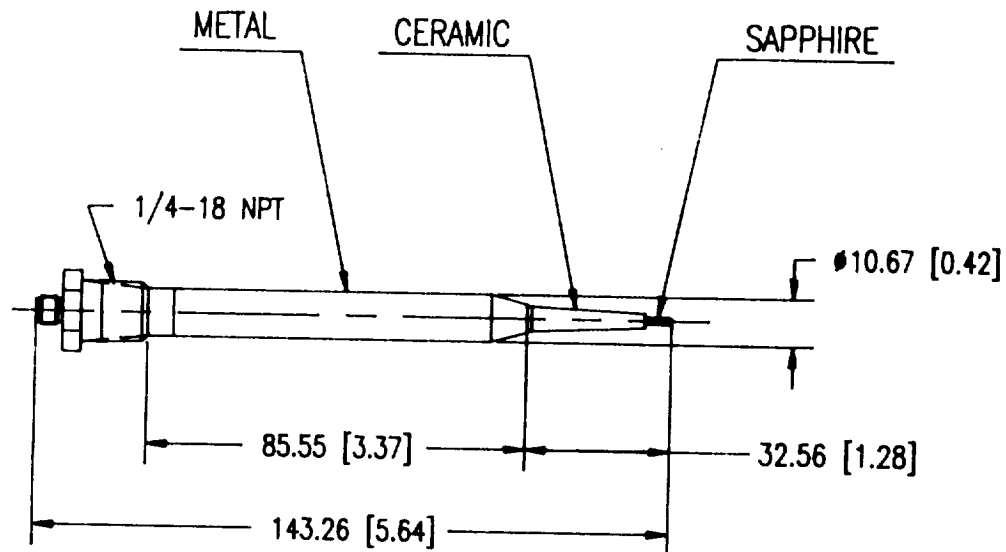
Probe design for laboratory combustor. Units of dimensions are mm (in).
